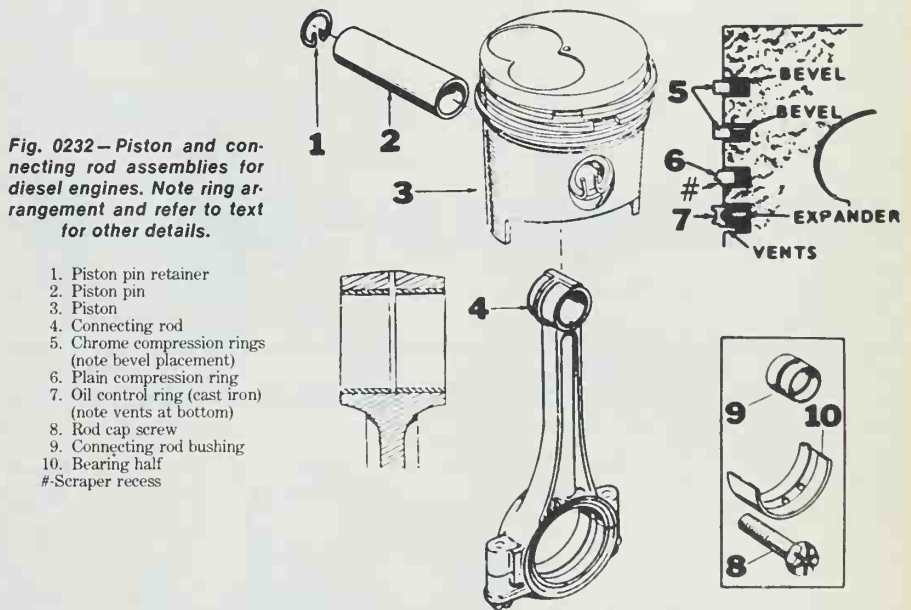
Piston and connecting rod assemblies for diesel engines. Note ring arrangement and refer to text for other details.
